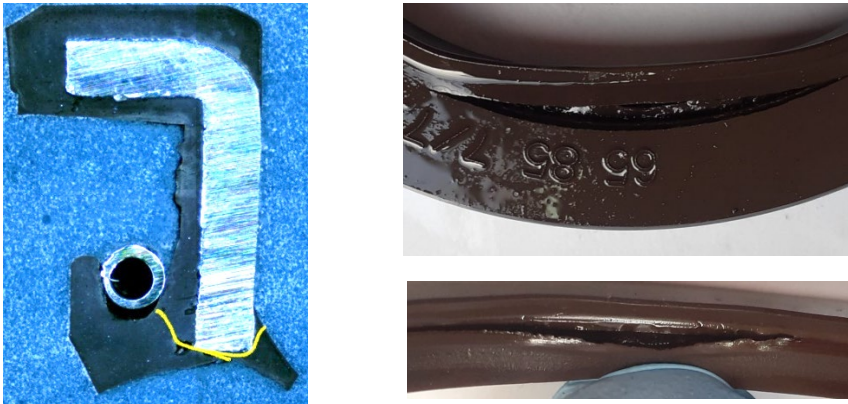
Cross-section of seal after 600hrs on machine conditions with crack presence
